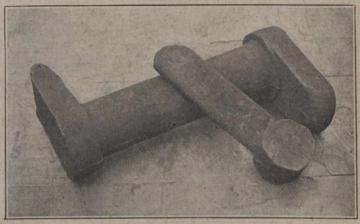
Grate Shaker Shaft and Smokebox Brace Produced on the Forging Fig. 6.—Spring Hanger and Rocker Barrel Produced on the Forging Machine.
